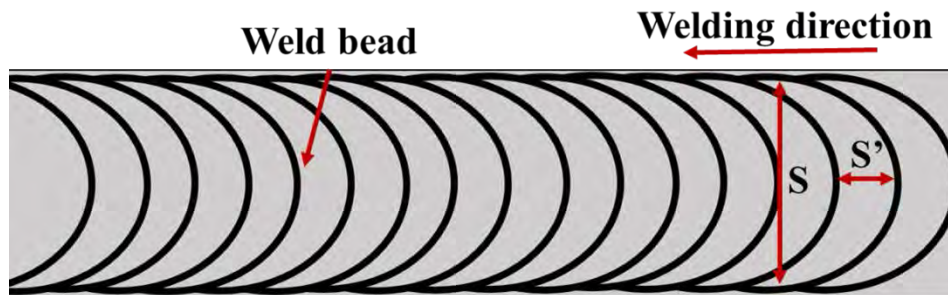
Schematic of P-LBW weld bead consisting of a sequence of overlapped spots
